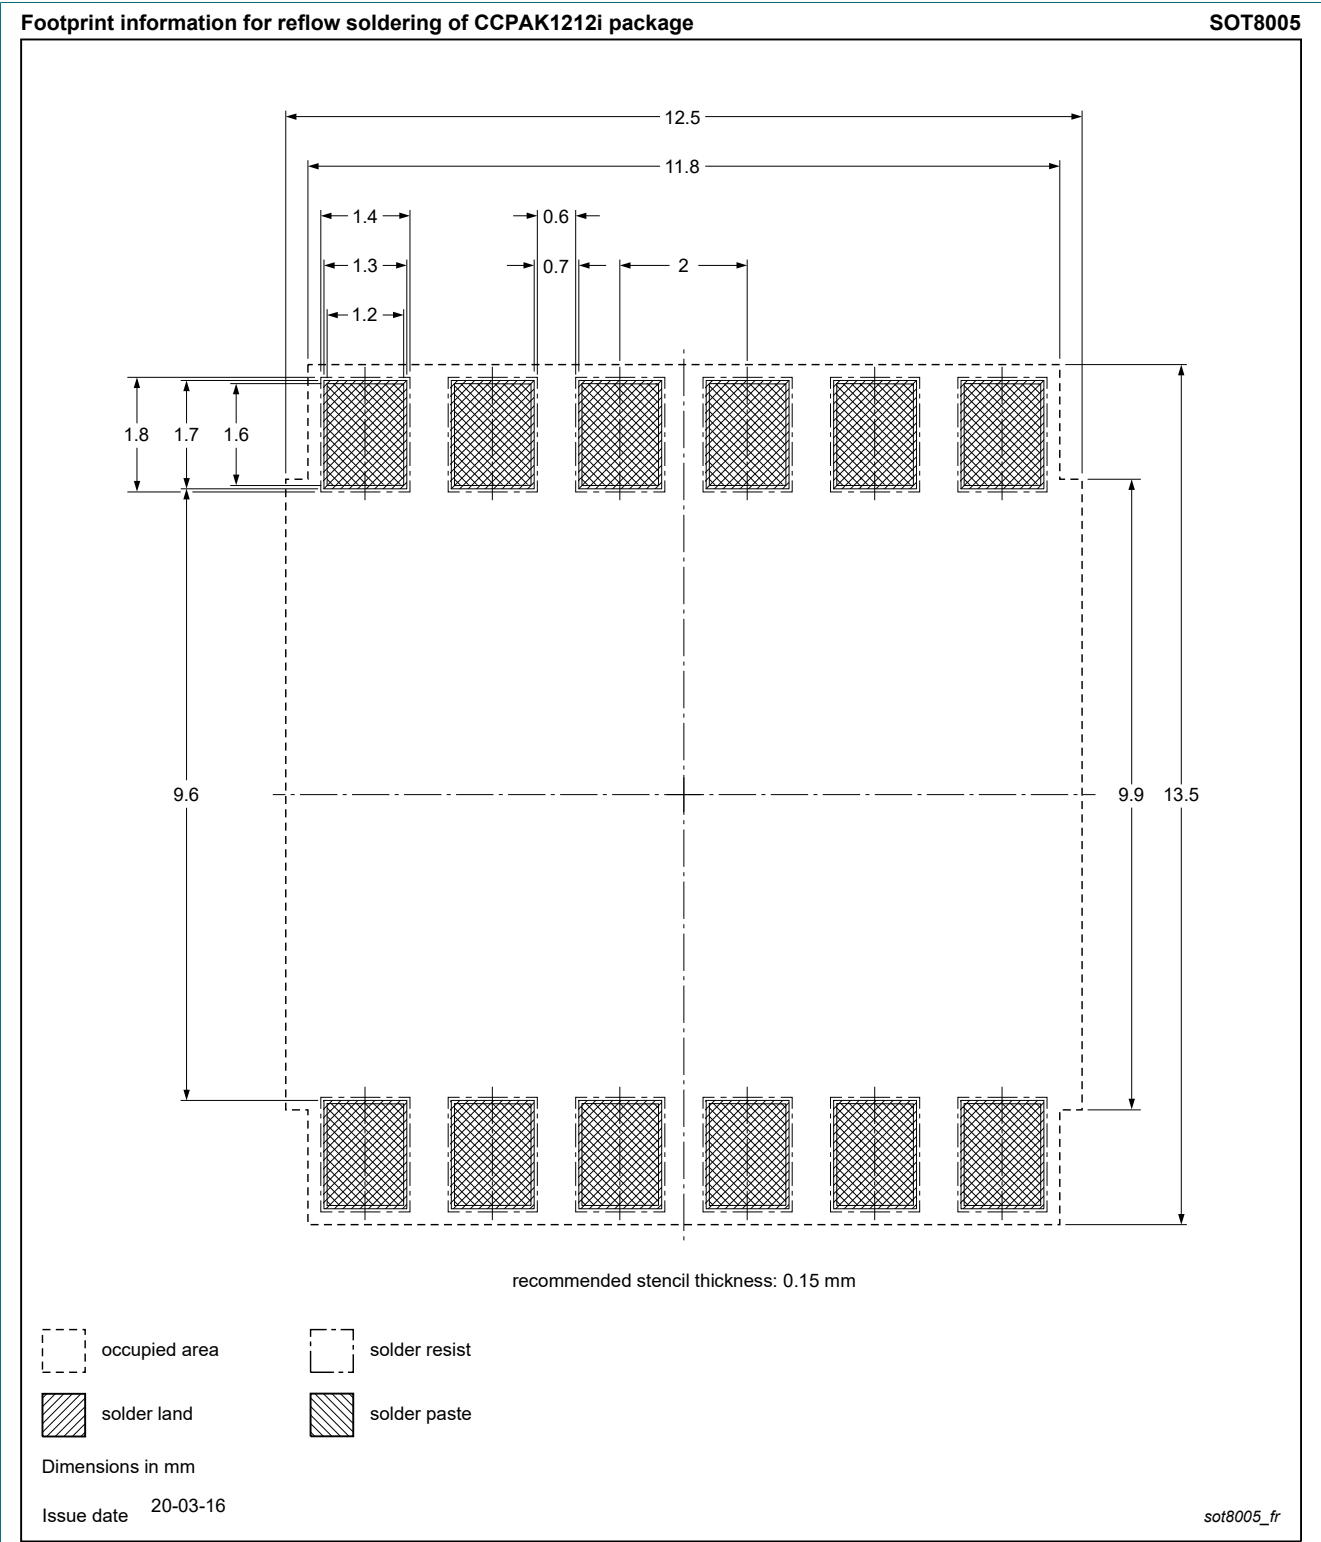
Reflow soldering footprint for CCPAK1212i (SOT8005A)
